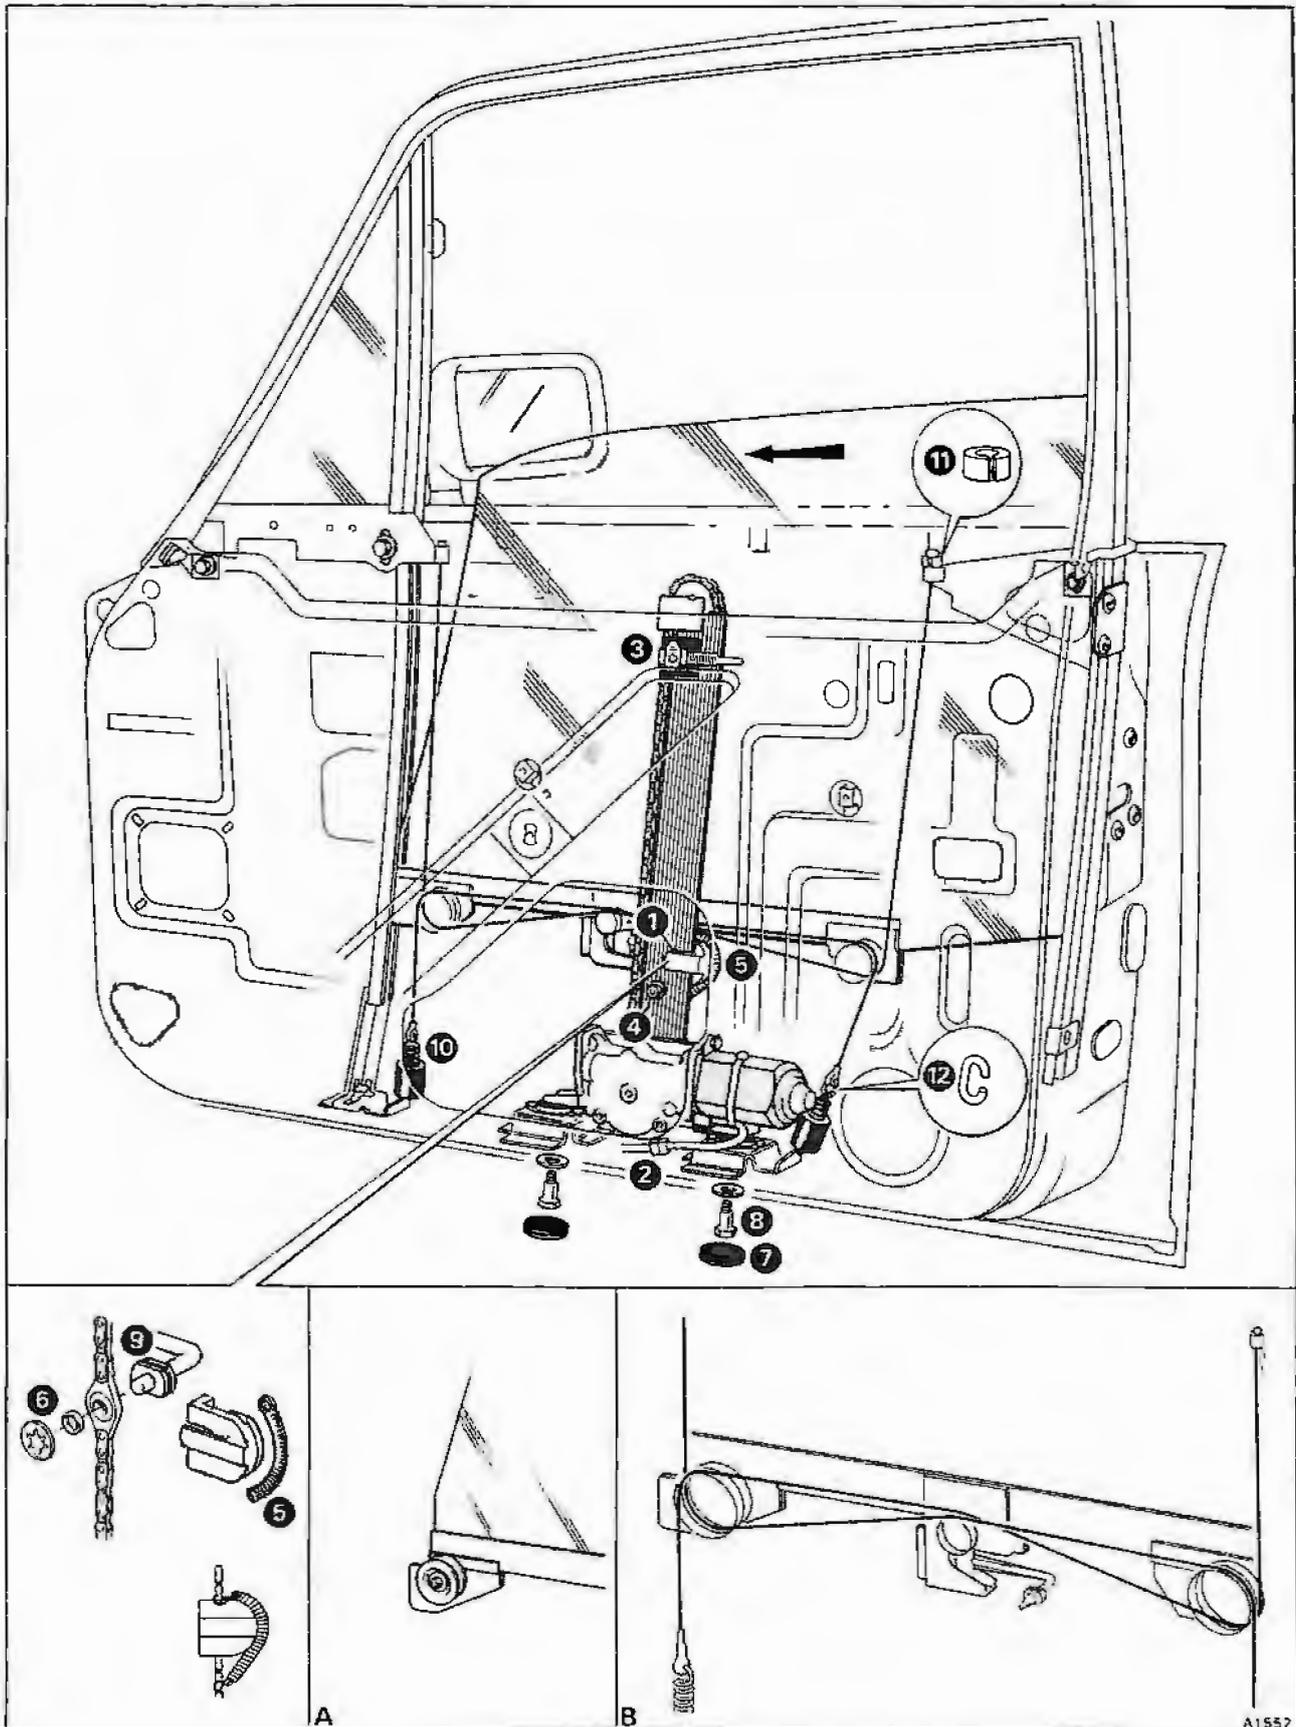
Window lift mechanism, door glass, and wire guidance assembly and fittings
